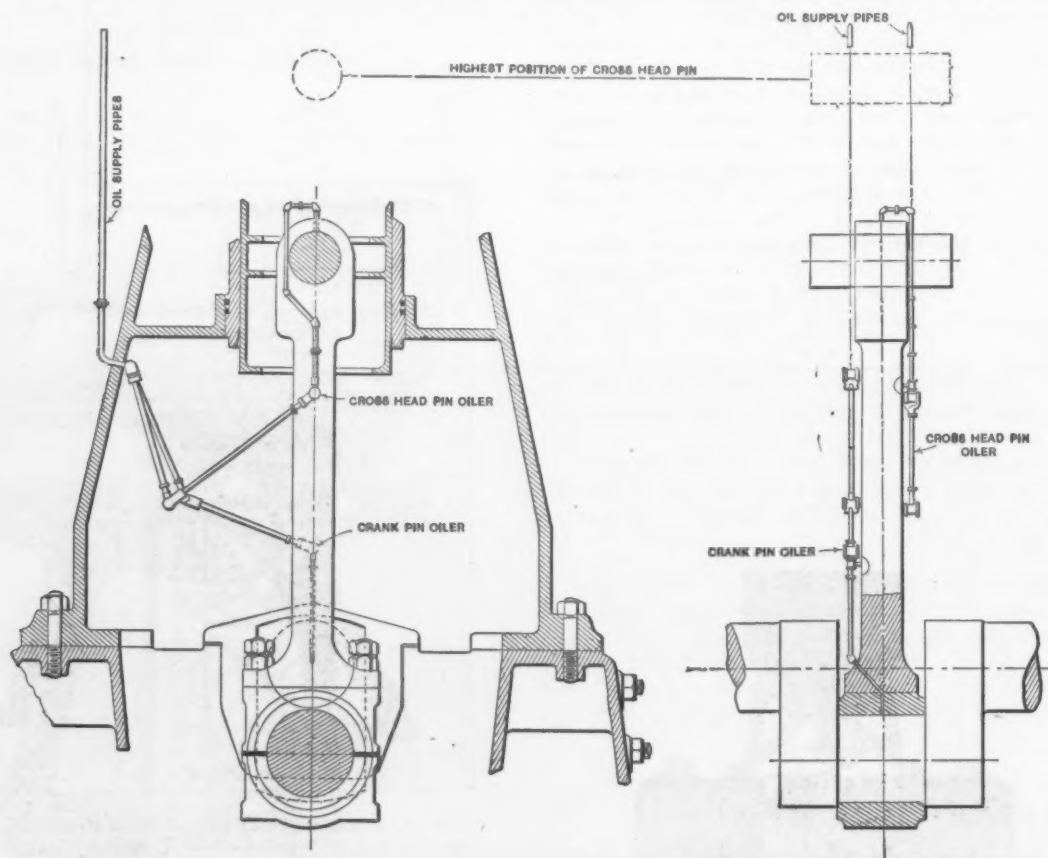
Oil Device for a Vertical Gas Engine Made by Wm. W. Nugent & Co., Chicago, Ill.
